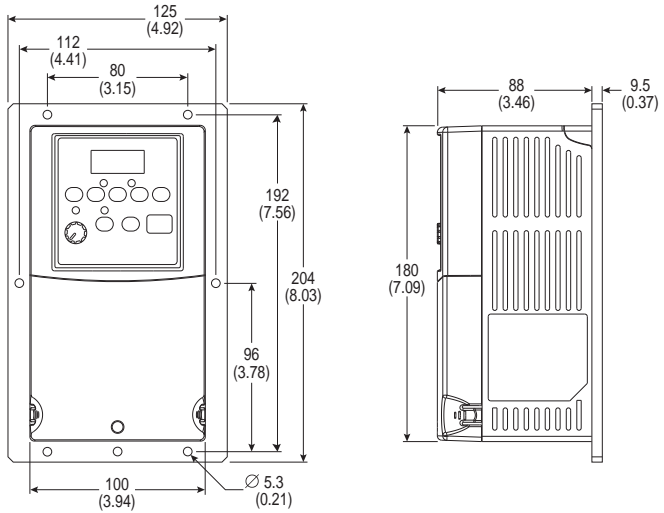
PowerFlex 40 Flange Mount Drives – Dimensions are in millimeters and (inches)
